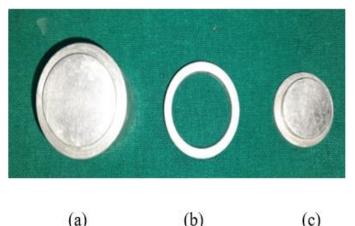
(a) Ruled block (B) Test material mold (C) riser
